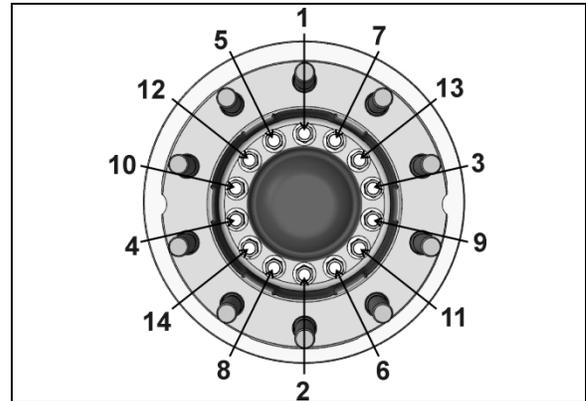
HUB FLANGE HEX CAP SCREW TIGHTENING SEQUENCE
